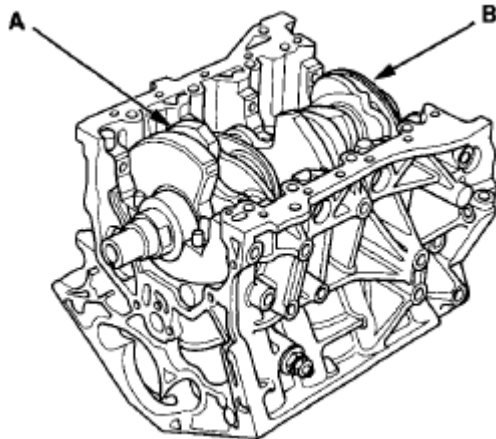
Identifying Crankshaft And CKP Pulse Plate
